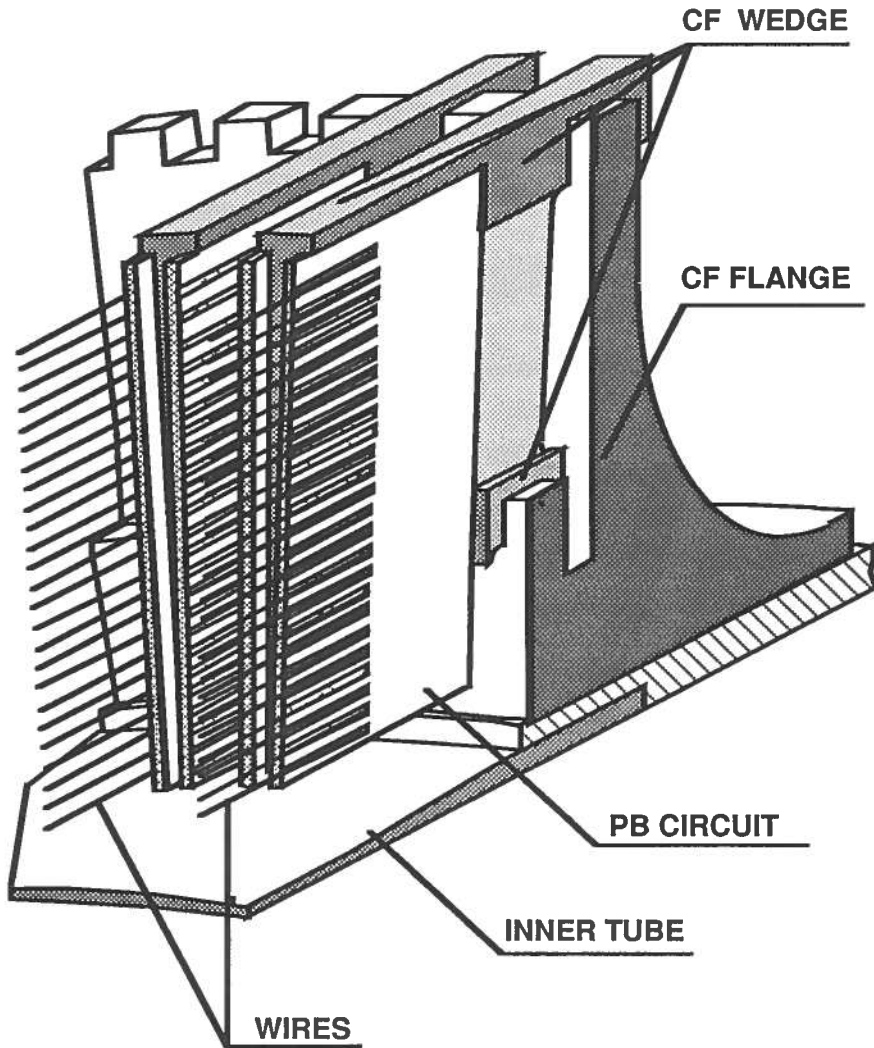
A schematic drawing of the prototype CF cog-wheel with a wedge mounted on it.
